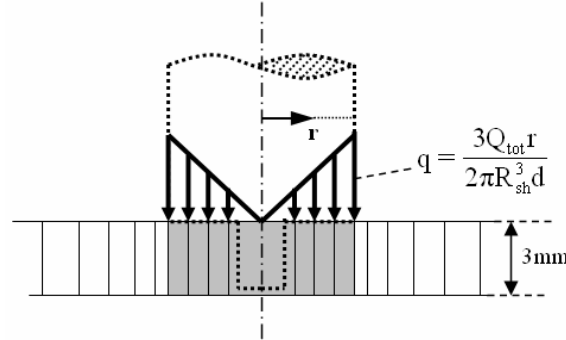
Schematic view of tool geometry with applied linear heat source on tool shoulder
